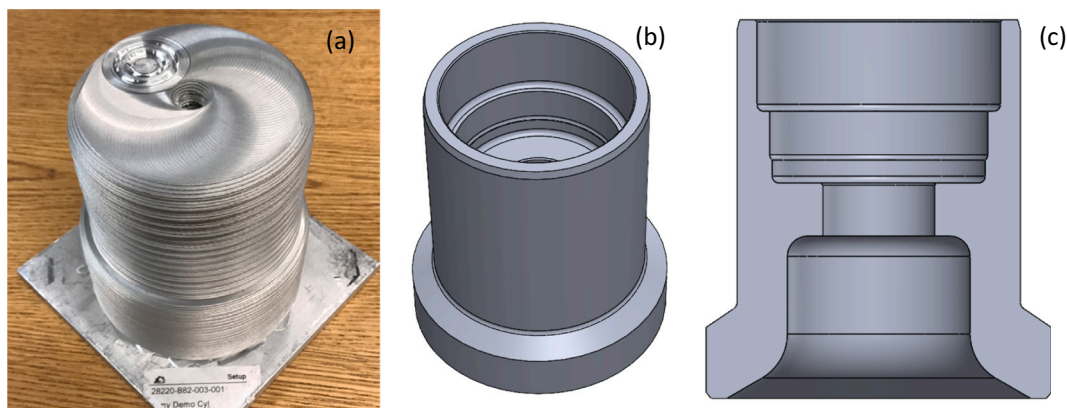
(a) Preform printed using MELD solid-state additive process. The build plate is approximately 150 mm × 150 mm × 6 mm in size. (b) Desired CAD geometry. (c) CAD cross section showing the internal geometry.
